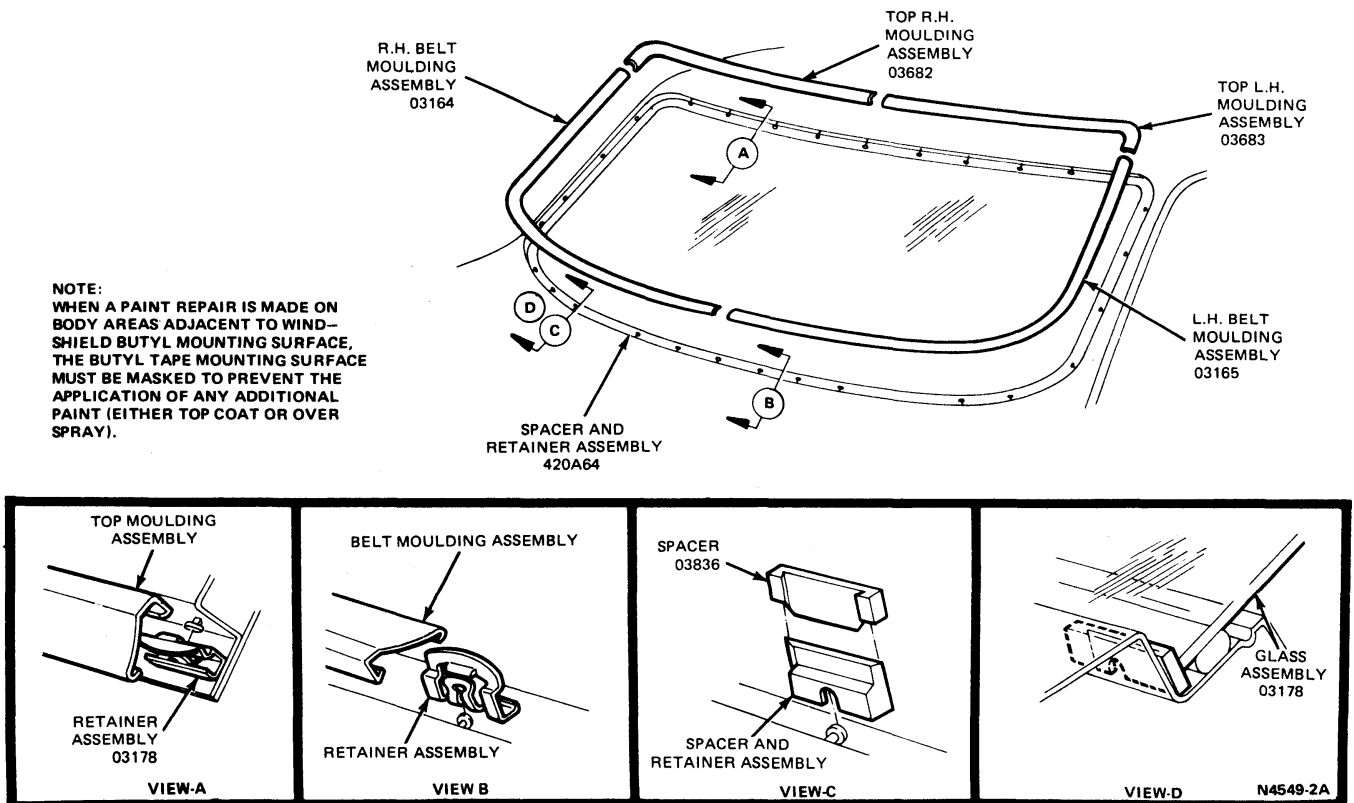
Windshield Clips and Mouldings—E-100—E-350
